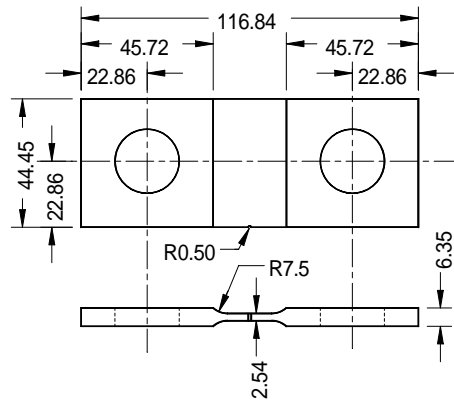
Specimen used for mode I crack growth testing. All dimensions in mm.
